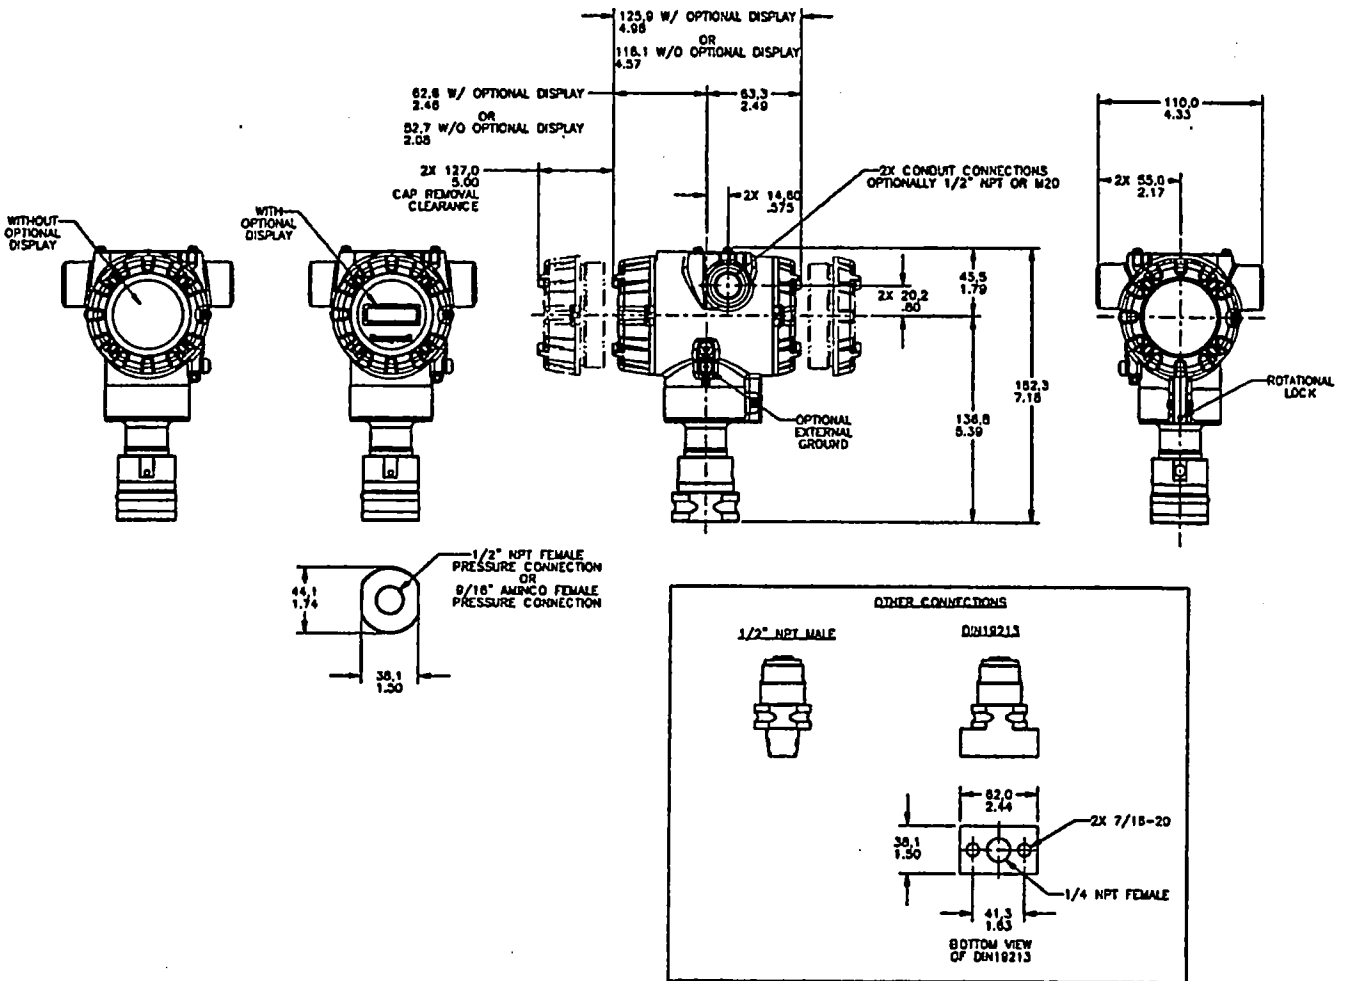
Typical mounting dimensions of STG74L, STG77L, STG78L, & STG79L for reference
